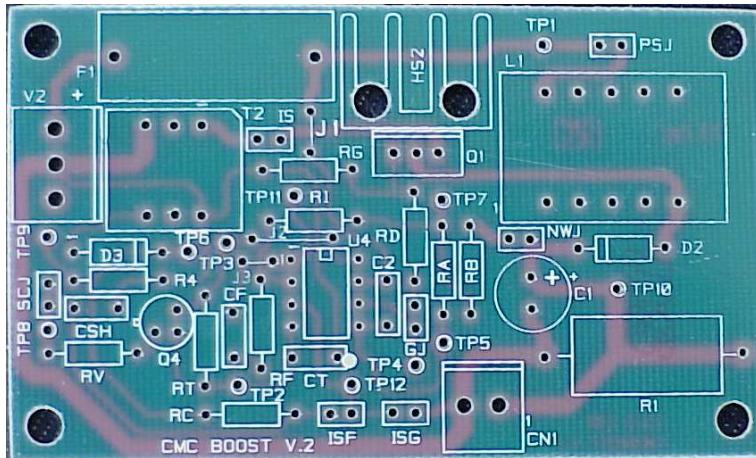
Bare PCB Board of the CMC-Boost Converter
